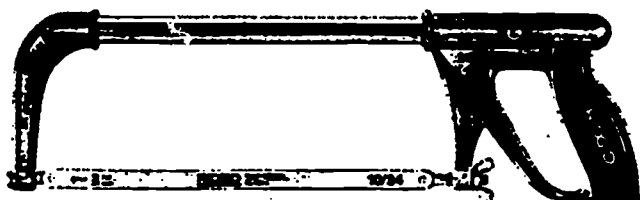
Cuts heavy cable, pipe, and conduit. (Courtesy of The Ridge Tool Company)
